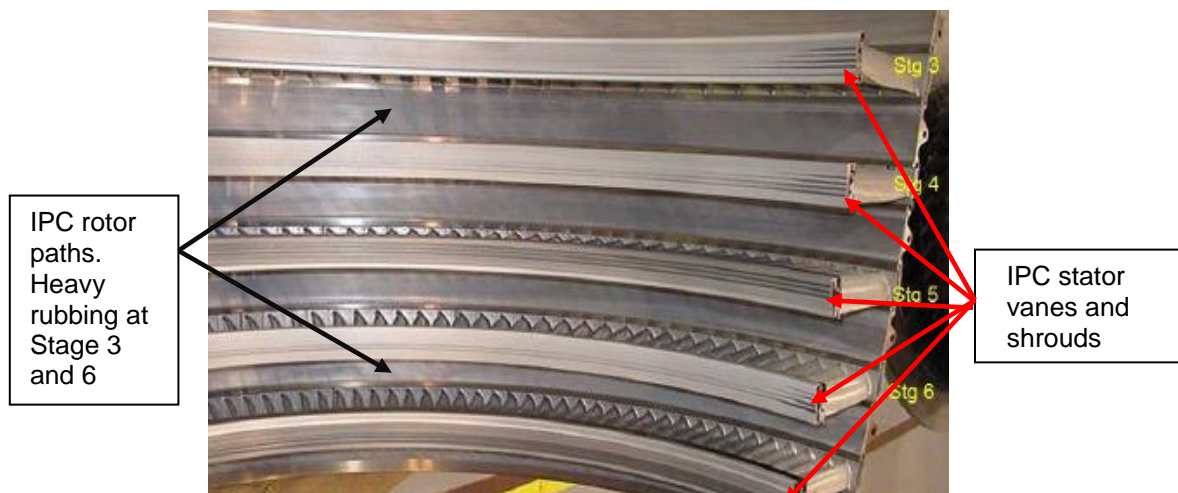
Engine casing showing alternating rotor path channels and stator vanes/shrouds
